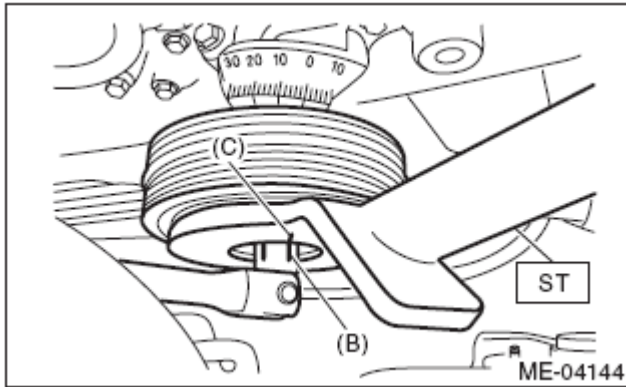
Tightening Crank Pulley Bolt Socket Using Crank Pulley Wrench
